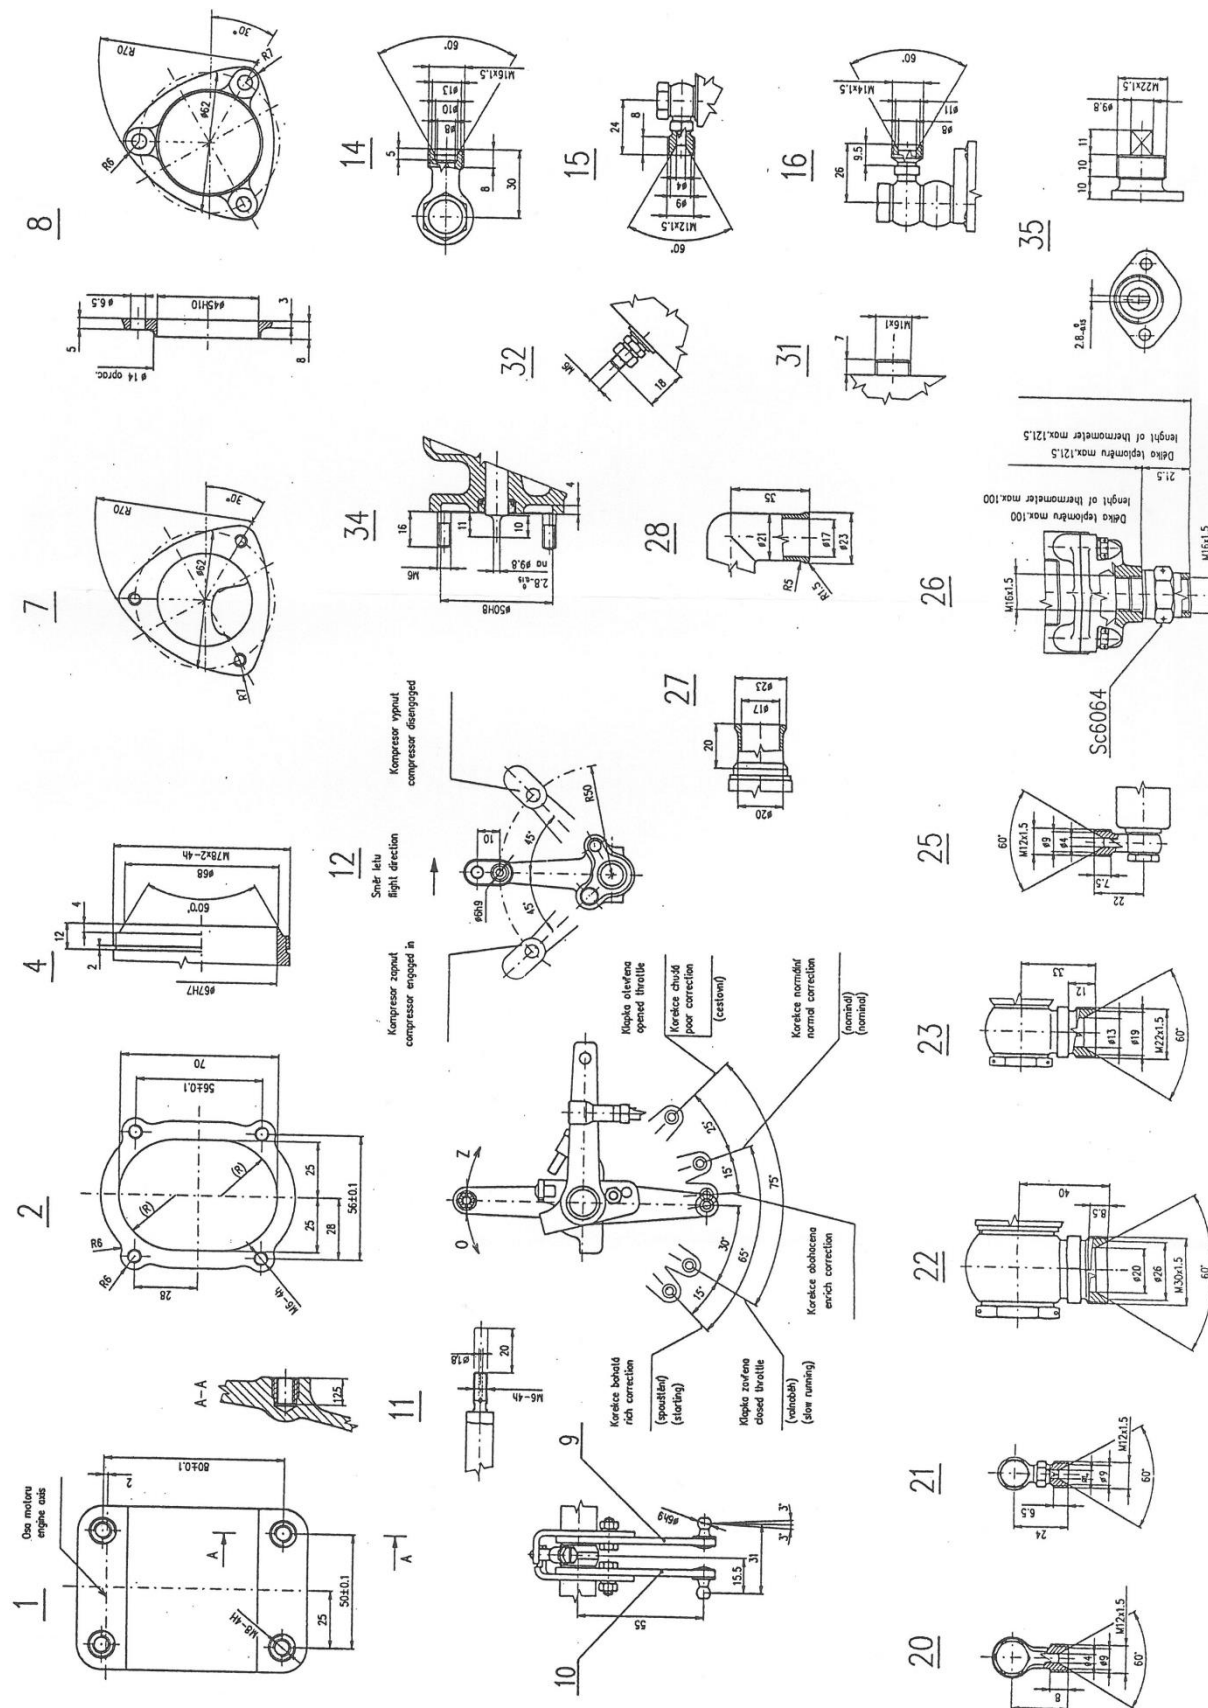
Miniature of Installation drawing of engine M132AK; engine attachments
